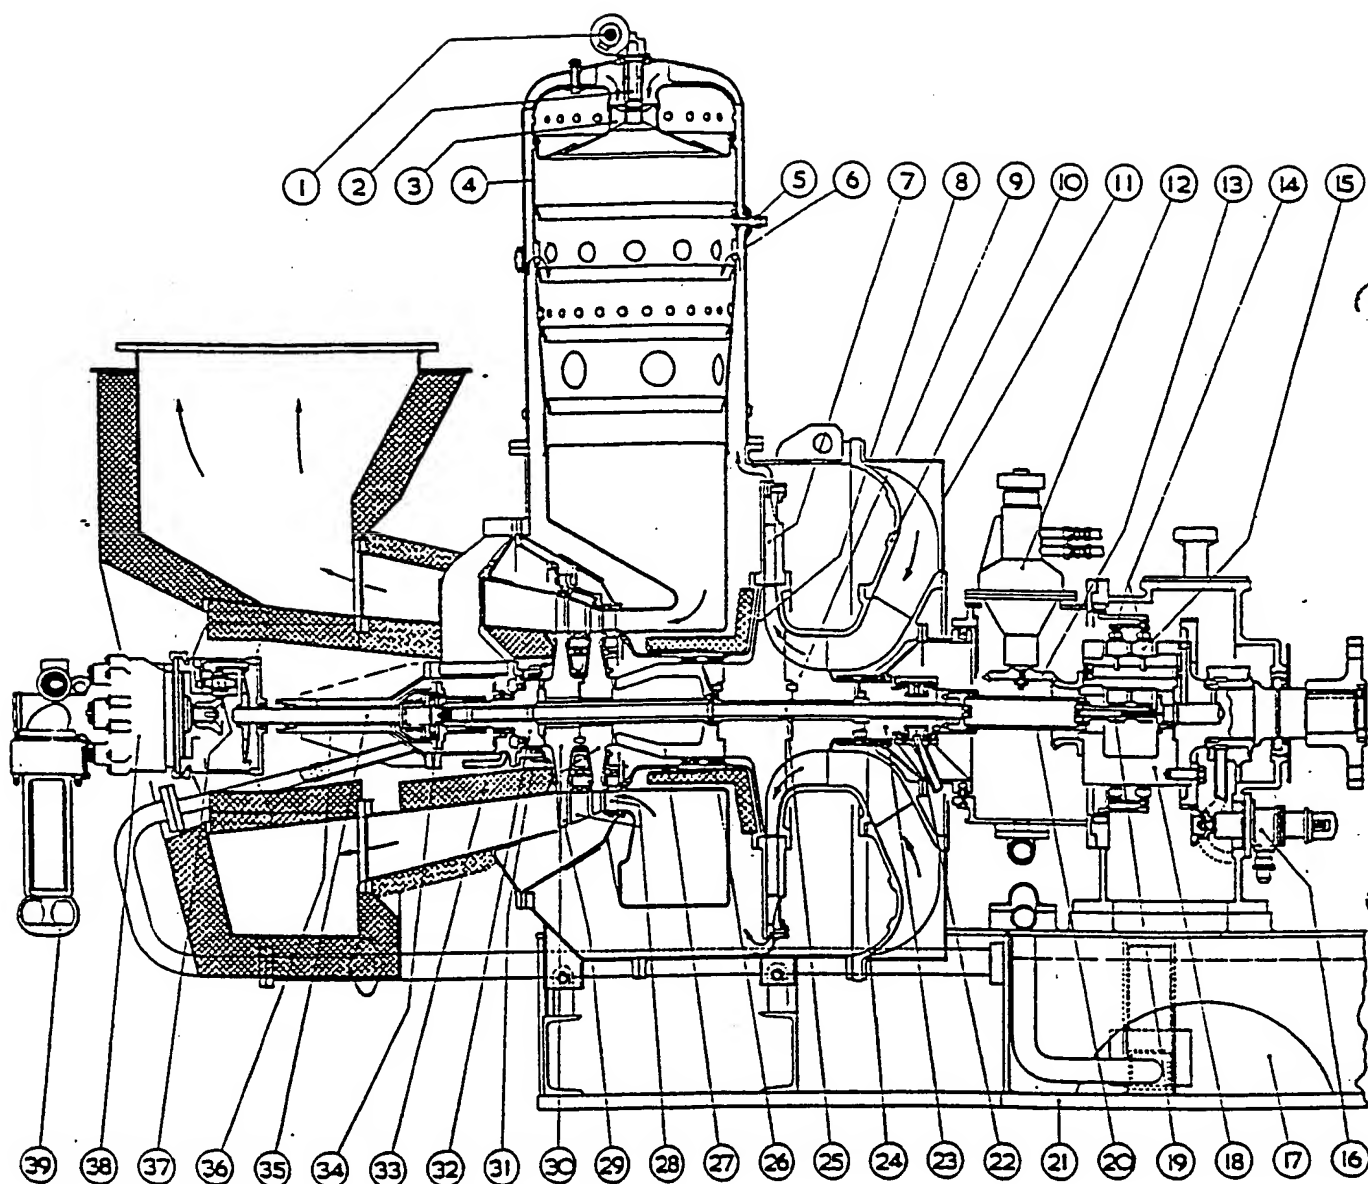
Sectional arrangement of Allen 350 kW gas turbine
